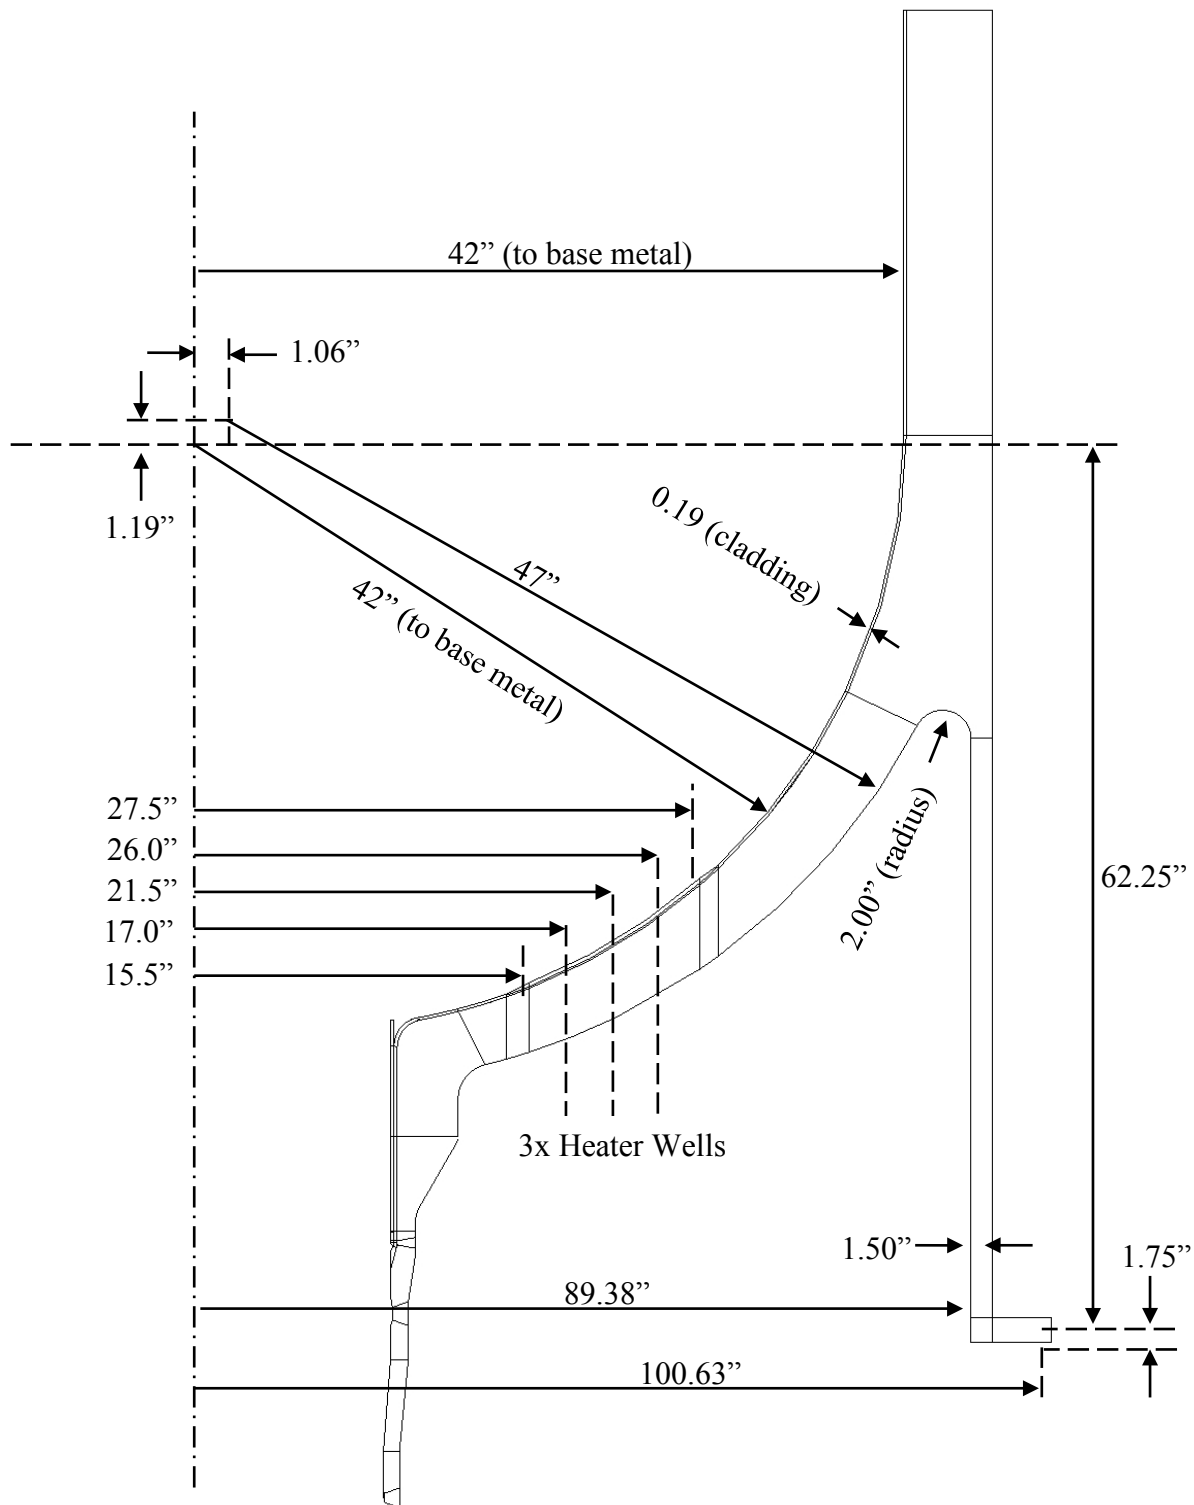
Pressurizer Bottom Head and Support Skirt Dimensions
